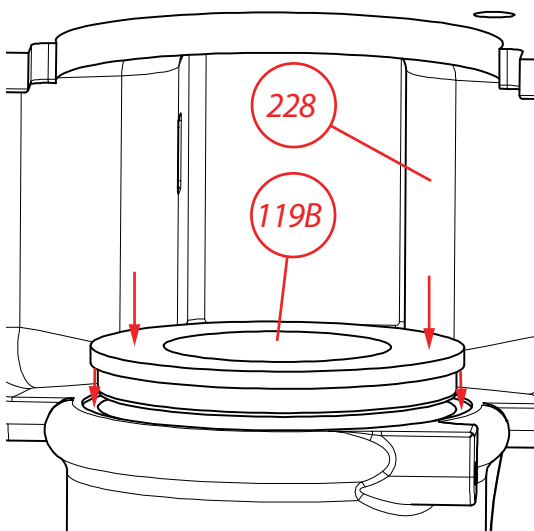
Lubricate and squarely set End Cover (119B) to bore.
